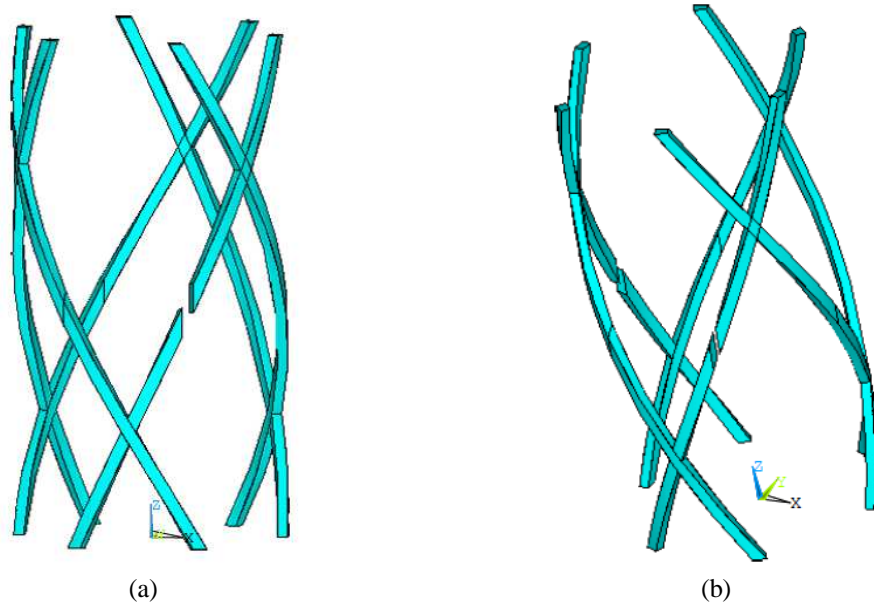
FE model of defective ribs, (a) cut out in the center, (b) model with two cut outs in rib
